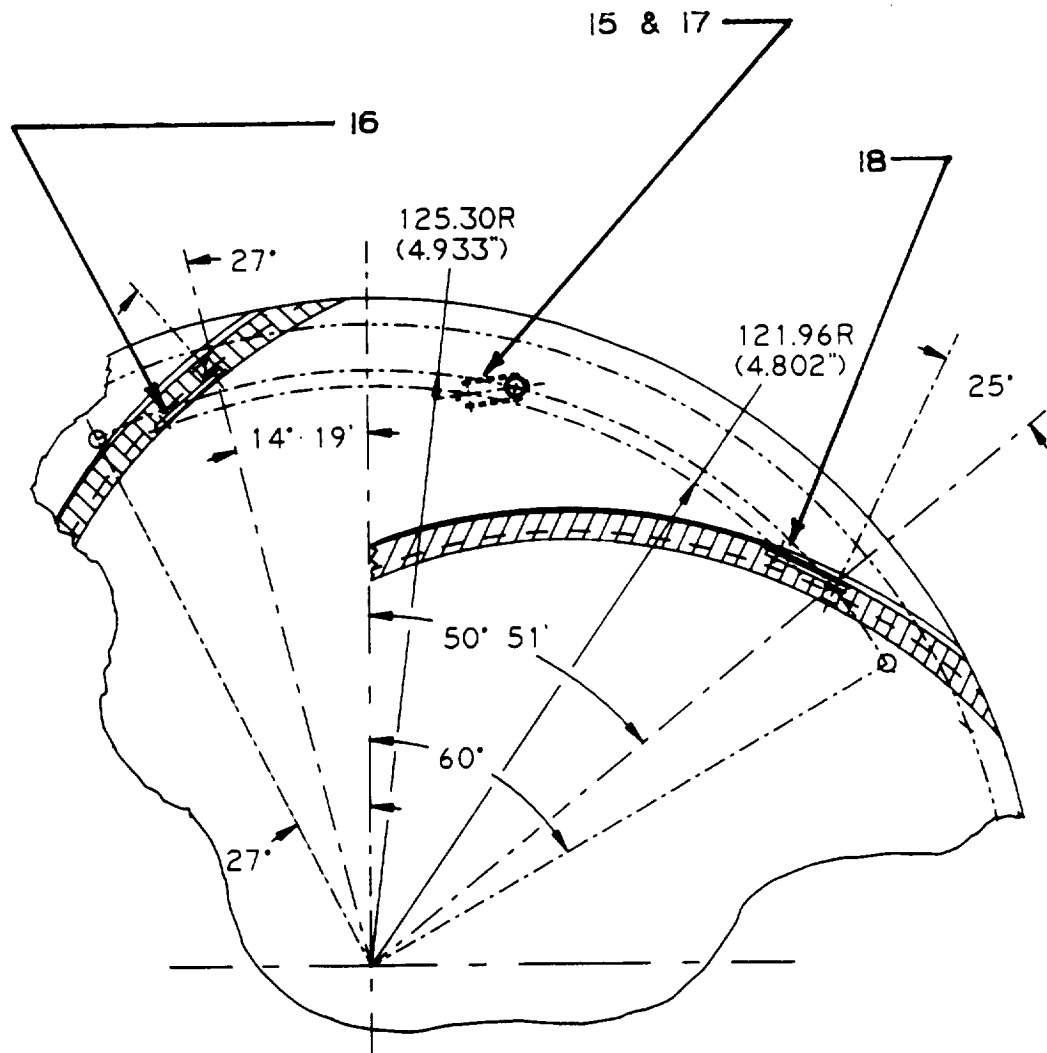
Impeller Sensor Mounting Locations on Suction and Pressure Side Surfaces.
